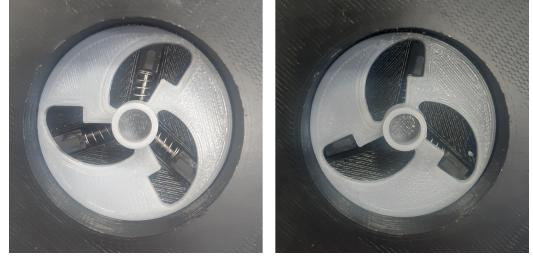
Bottom views of *Chaser* satellite prototype showing both unlocked (left) and locked (right) positions of the spindle.
